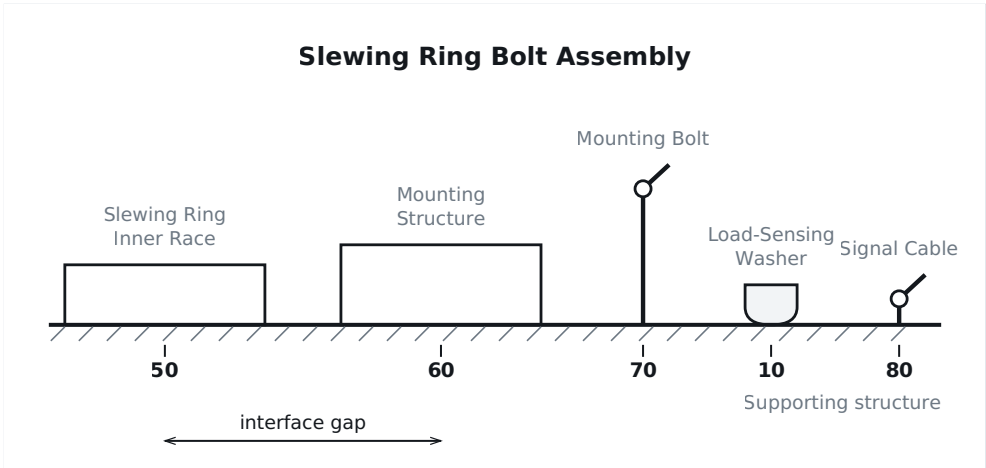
An elevation view showing a conceptual arrangement of a load-sensing washer integrated into a slewing ring mounting. PNG
